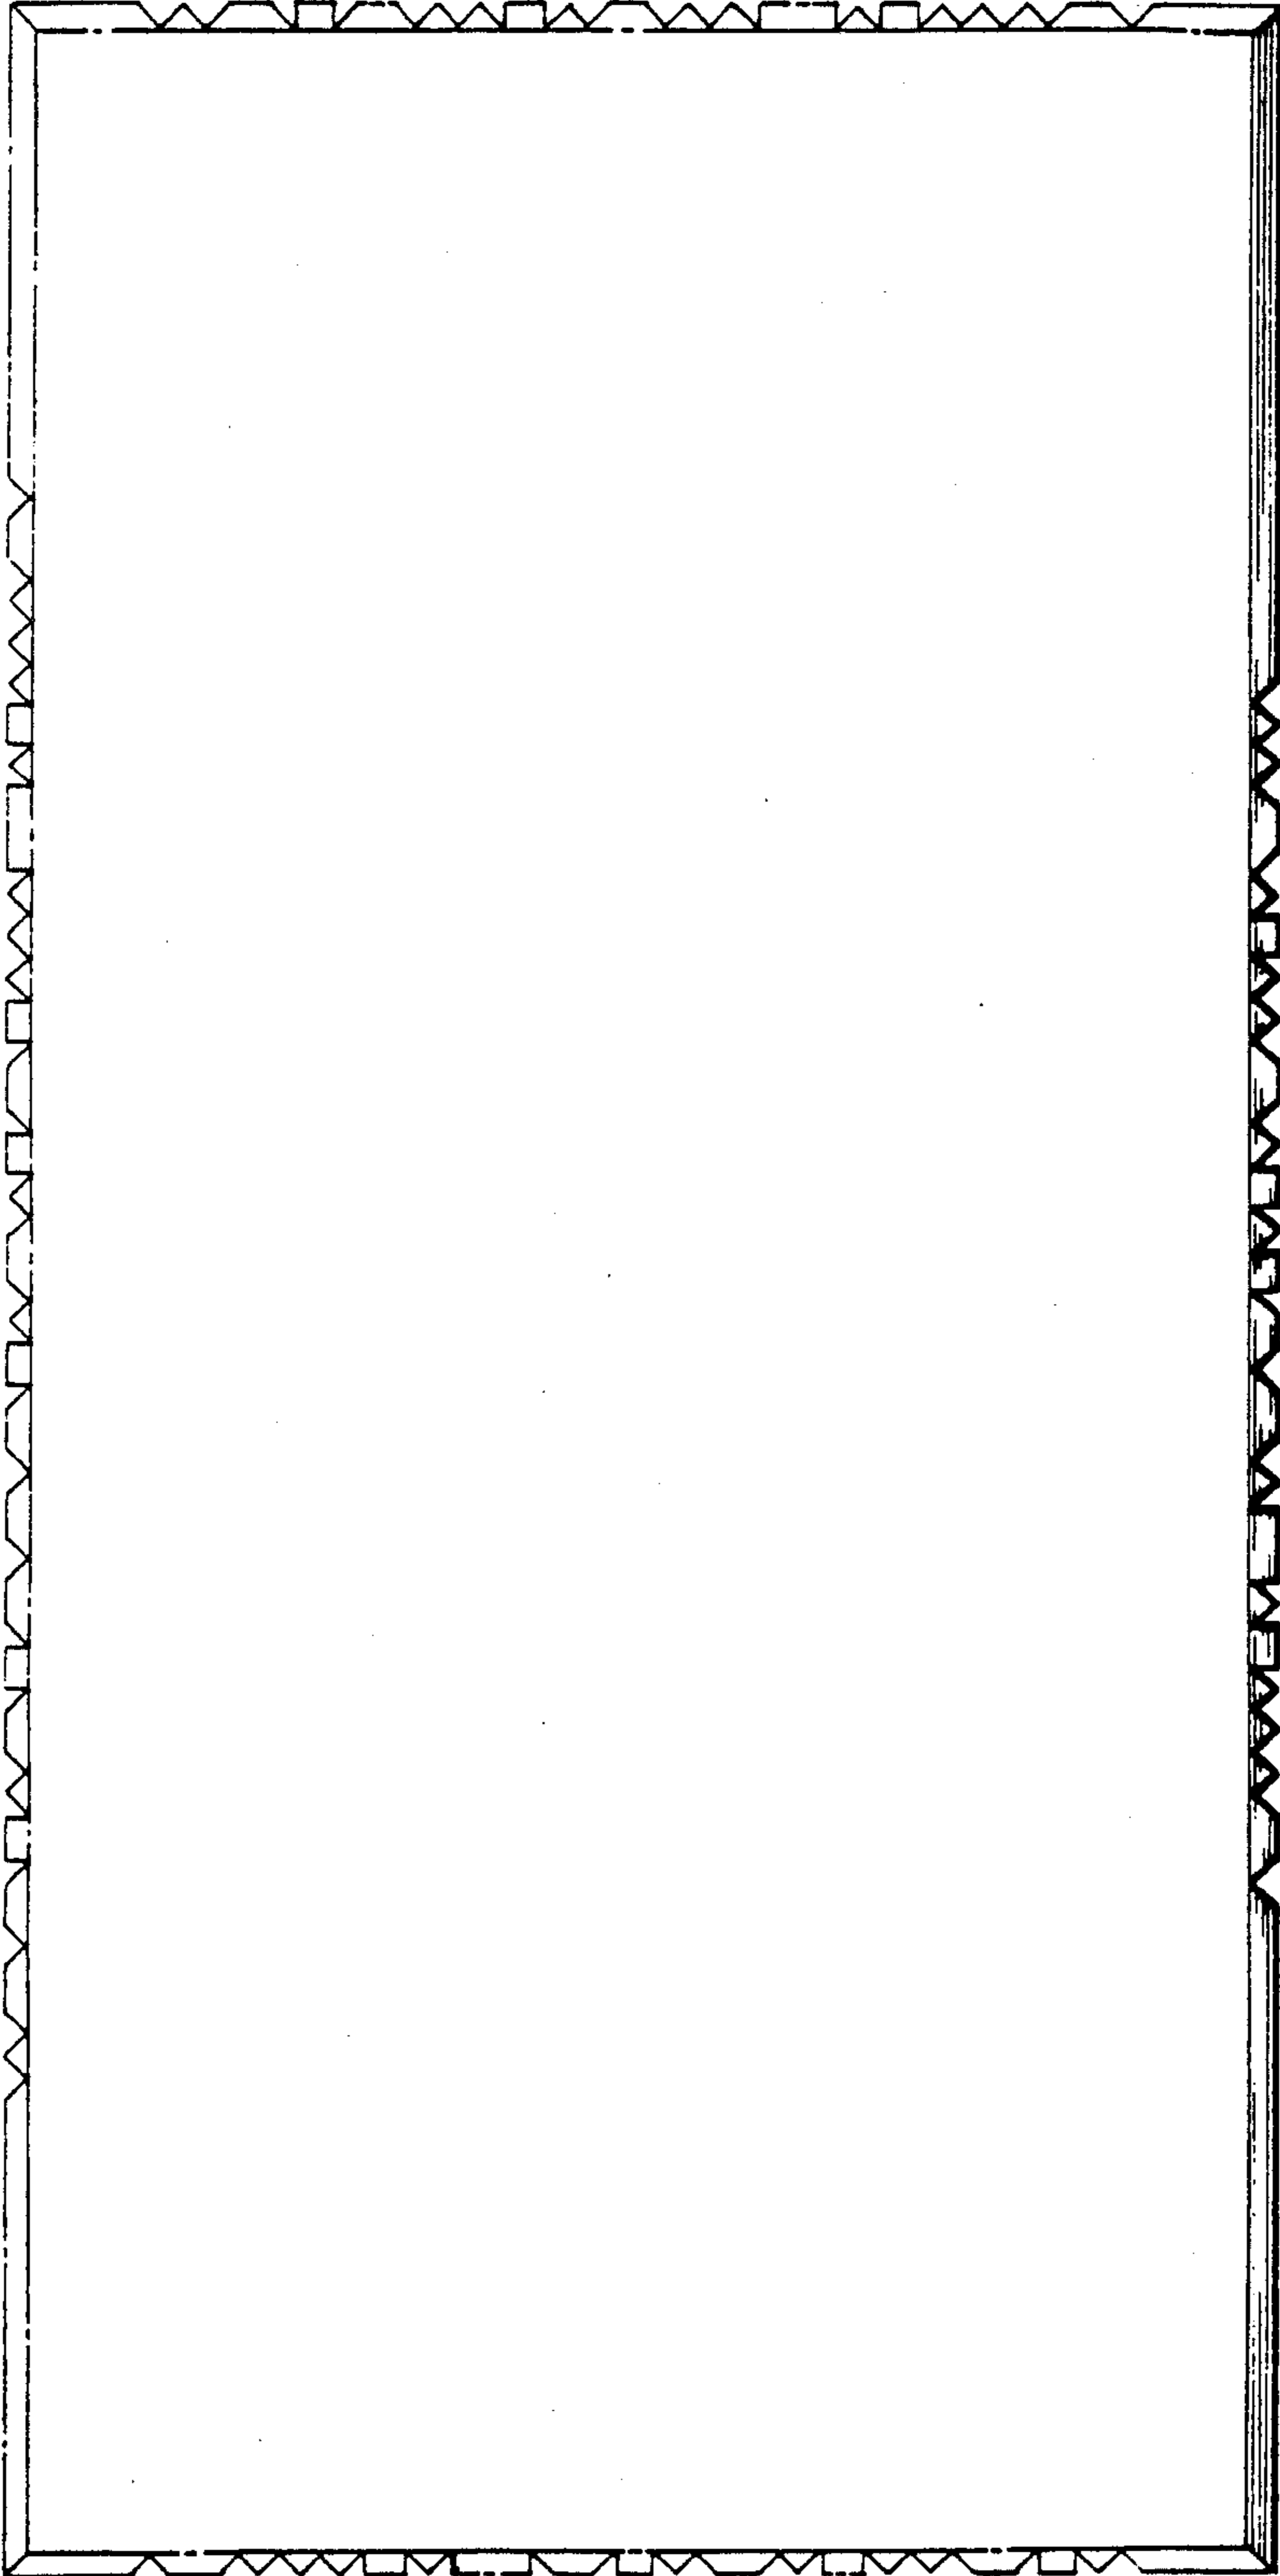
is a perspective view of a trim element for a furniture panel, showing my new design;
